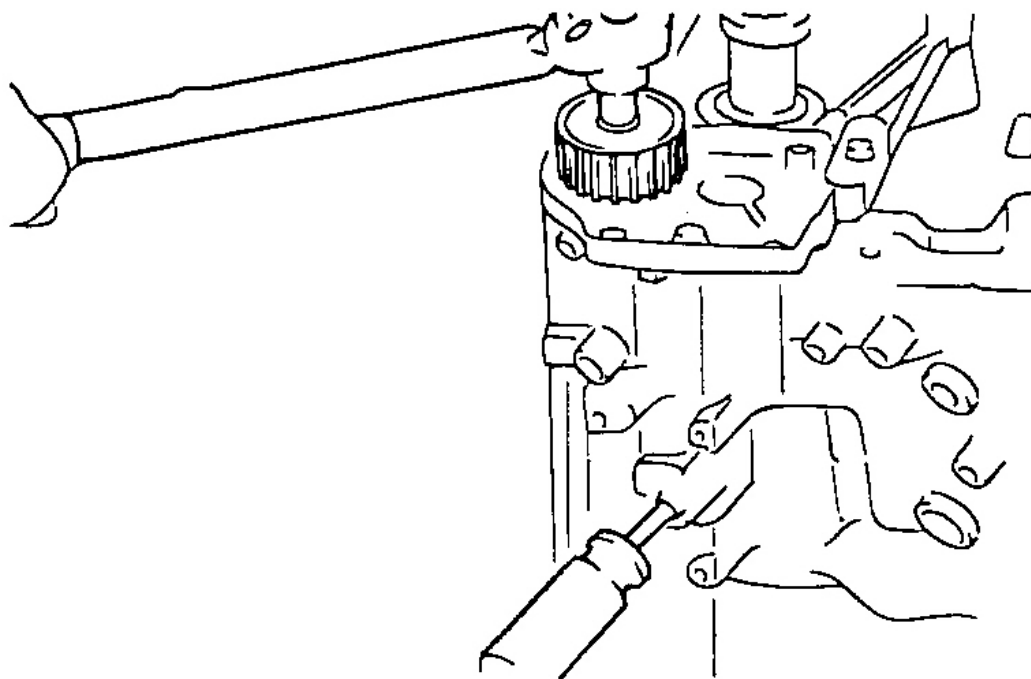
Installing Screwdriver In Plug Hole To Hold Shaft In Position
